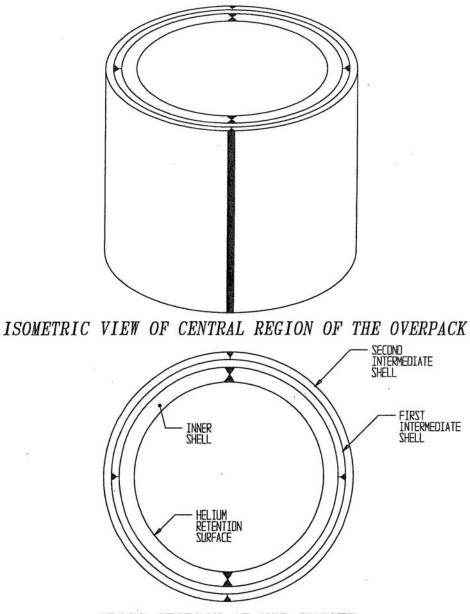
; CROSS SECTION ELEVATION VIEW OF OVERPACK
